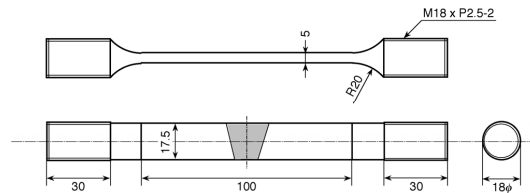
Creep test specimen for the dissimilar welded joint.
